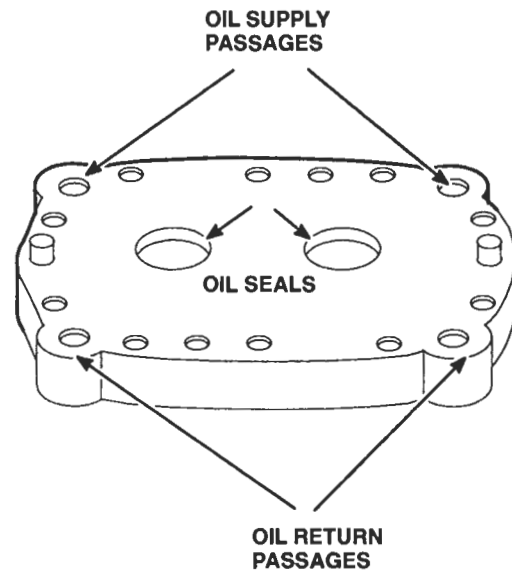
Blower End Plate and Lip Type Oil Seal Location
